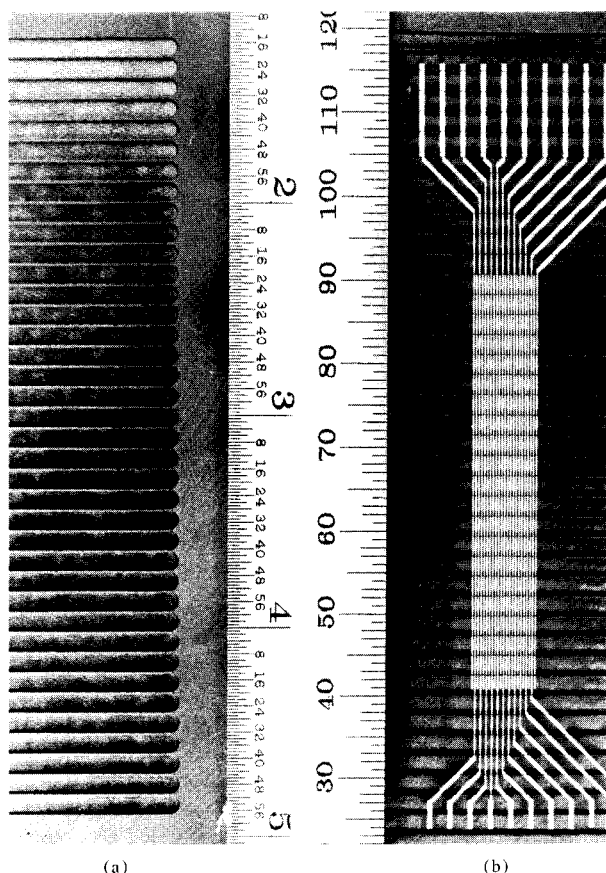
(a) Graphite mask after machining support ribs in top surface. (b) Completed mask with intact support ribs over line pattern formed by air abrasion.
